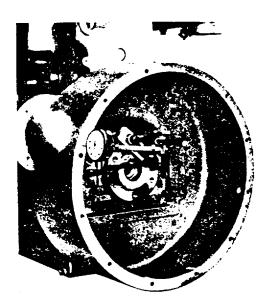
Checking Alignment of Flywheel Housing Face.
